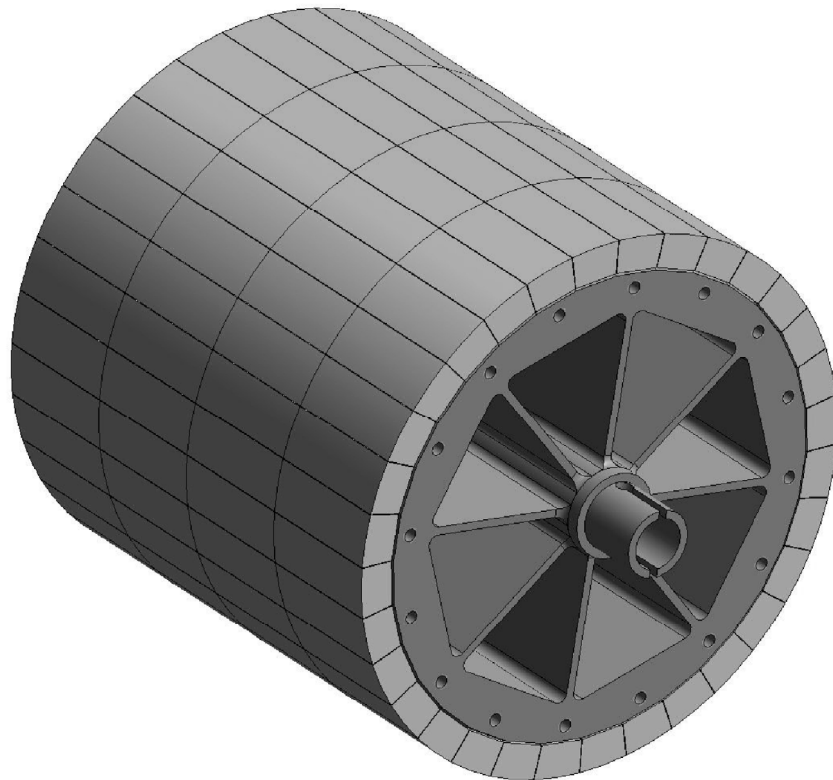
Internal view of radial Halbach magnetic bearing rotor.
